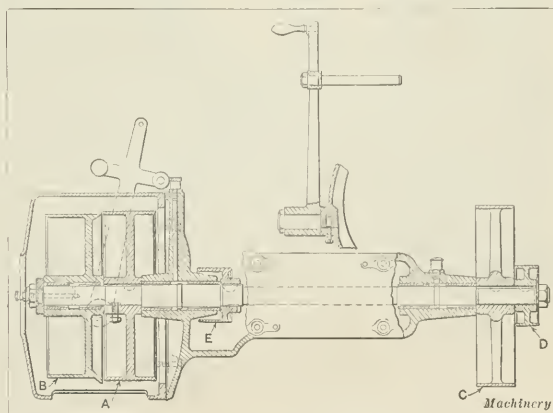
Main Driving Shaft Bracket, showing Connections to drive Wheel-spindle, Pump, and Speed and Feed Box
